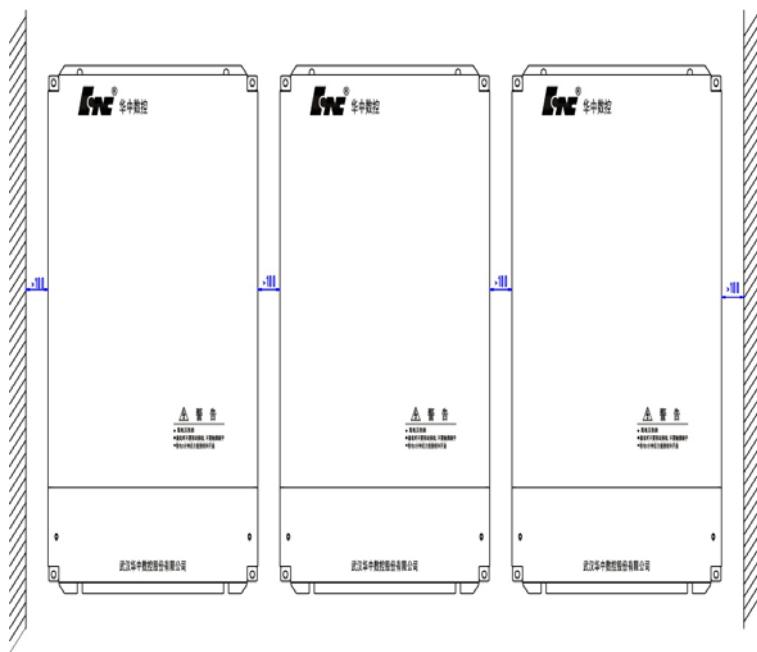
Installation space interval for HSV-180US-200, 300, 450 spindle drivers (unit: mm)
